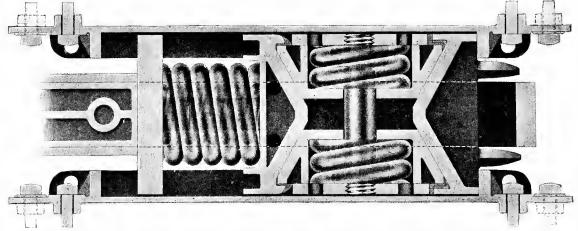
Republic Friction Draft Gear Under Buffing Compression. Western Railway Equipment Company.
